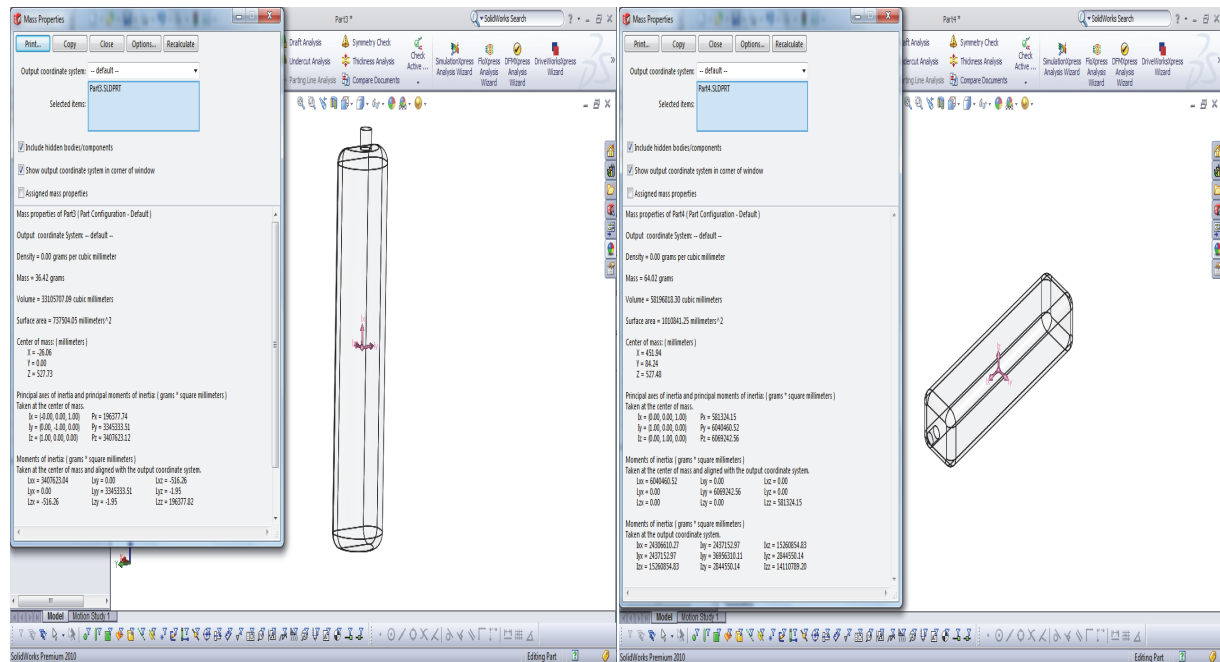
Design of Gas Cylinder (Front View), left image/Design of Gas Cylinder (ISOMETRIC View), right image
